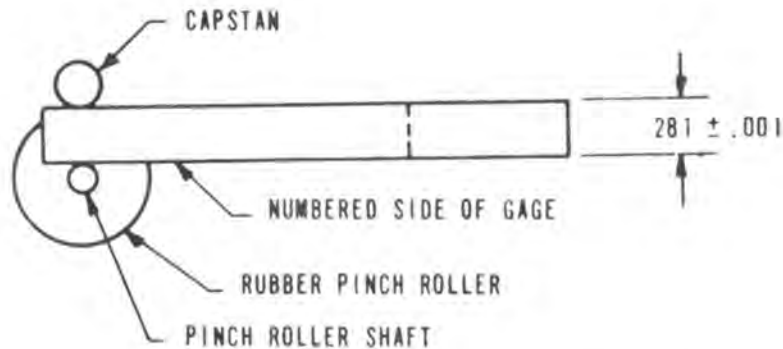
Pinch Roller Adjustment Gauge (Larger Portion of Gauge 815 0842 001)
